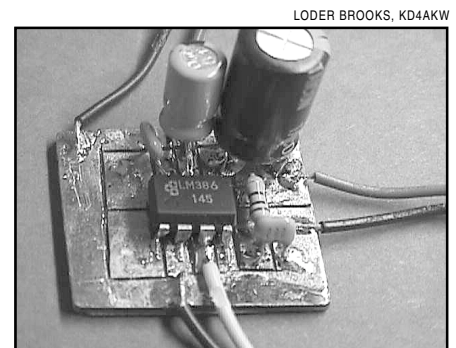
An LM386 audio amplifier built on a homemade PC board. The board's isolated pads are made by using a hobby tool to grind separating lines through the copper foil.
